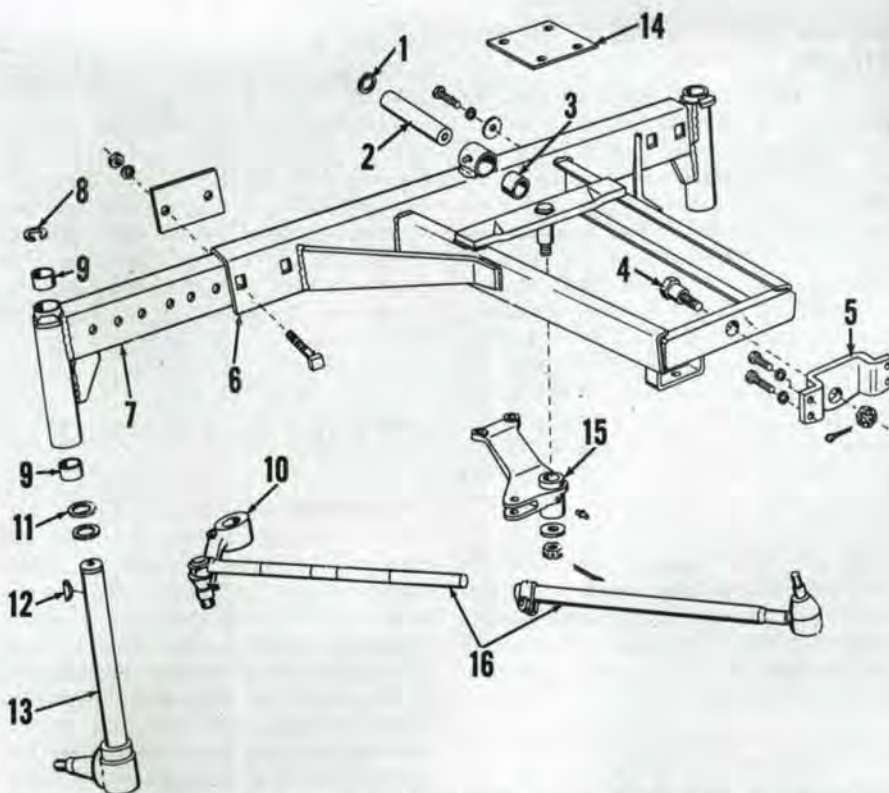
Exploded view of adjustable front axle assembly used on all models except 7000. Steering arm (14) is used with internal cylinder type front support (Fig. 12). Steering arm (15) is used with external cylinder type steering (Fig. 11).
